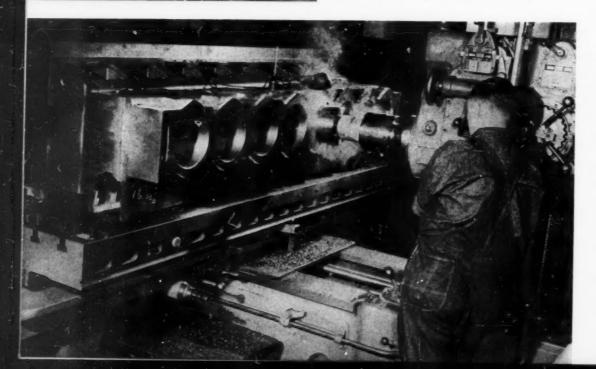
Fig. I. Above milling crankshaft bearing seat bores on a horizontal boring, drilling and milling machine. An angular milling attachment is used.
